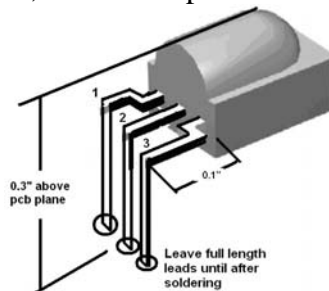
Infra-red detector for remote control mounts 0.3" above plane of pcb
